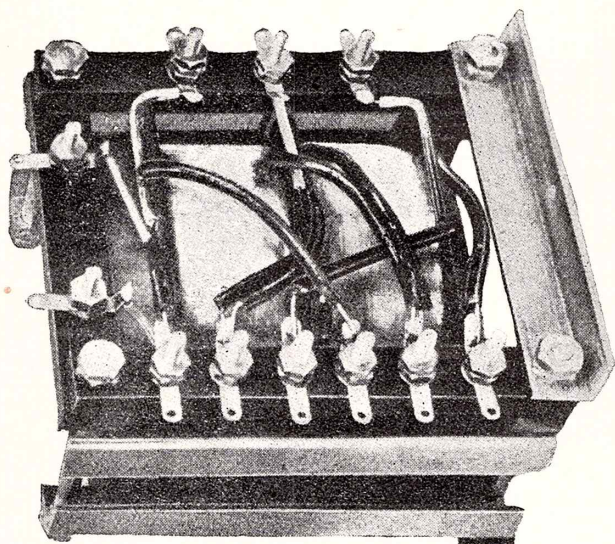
This view of the finished transformer shows clearly the manner in which the terminal battens are attached to the holding-down bolts.
